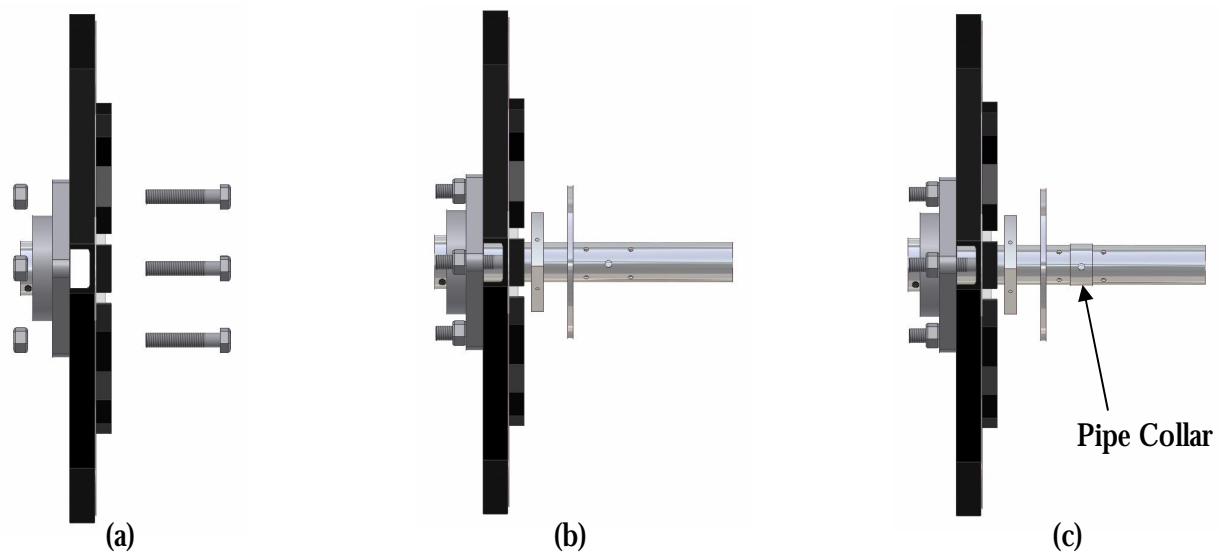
Assembled Parts of the Rotor and Stator on the Pipe. One end of the rotor should be assembled (a) and then placed onto the pipe (b). Then the square and circular aluminum supports of the stator should be placed on the pipe (b). Then the pipe collar (c) should be fastened to the pipe using *loctite
